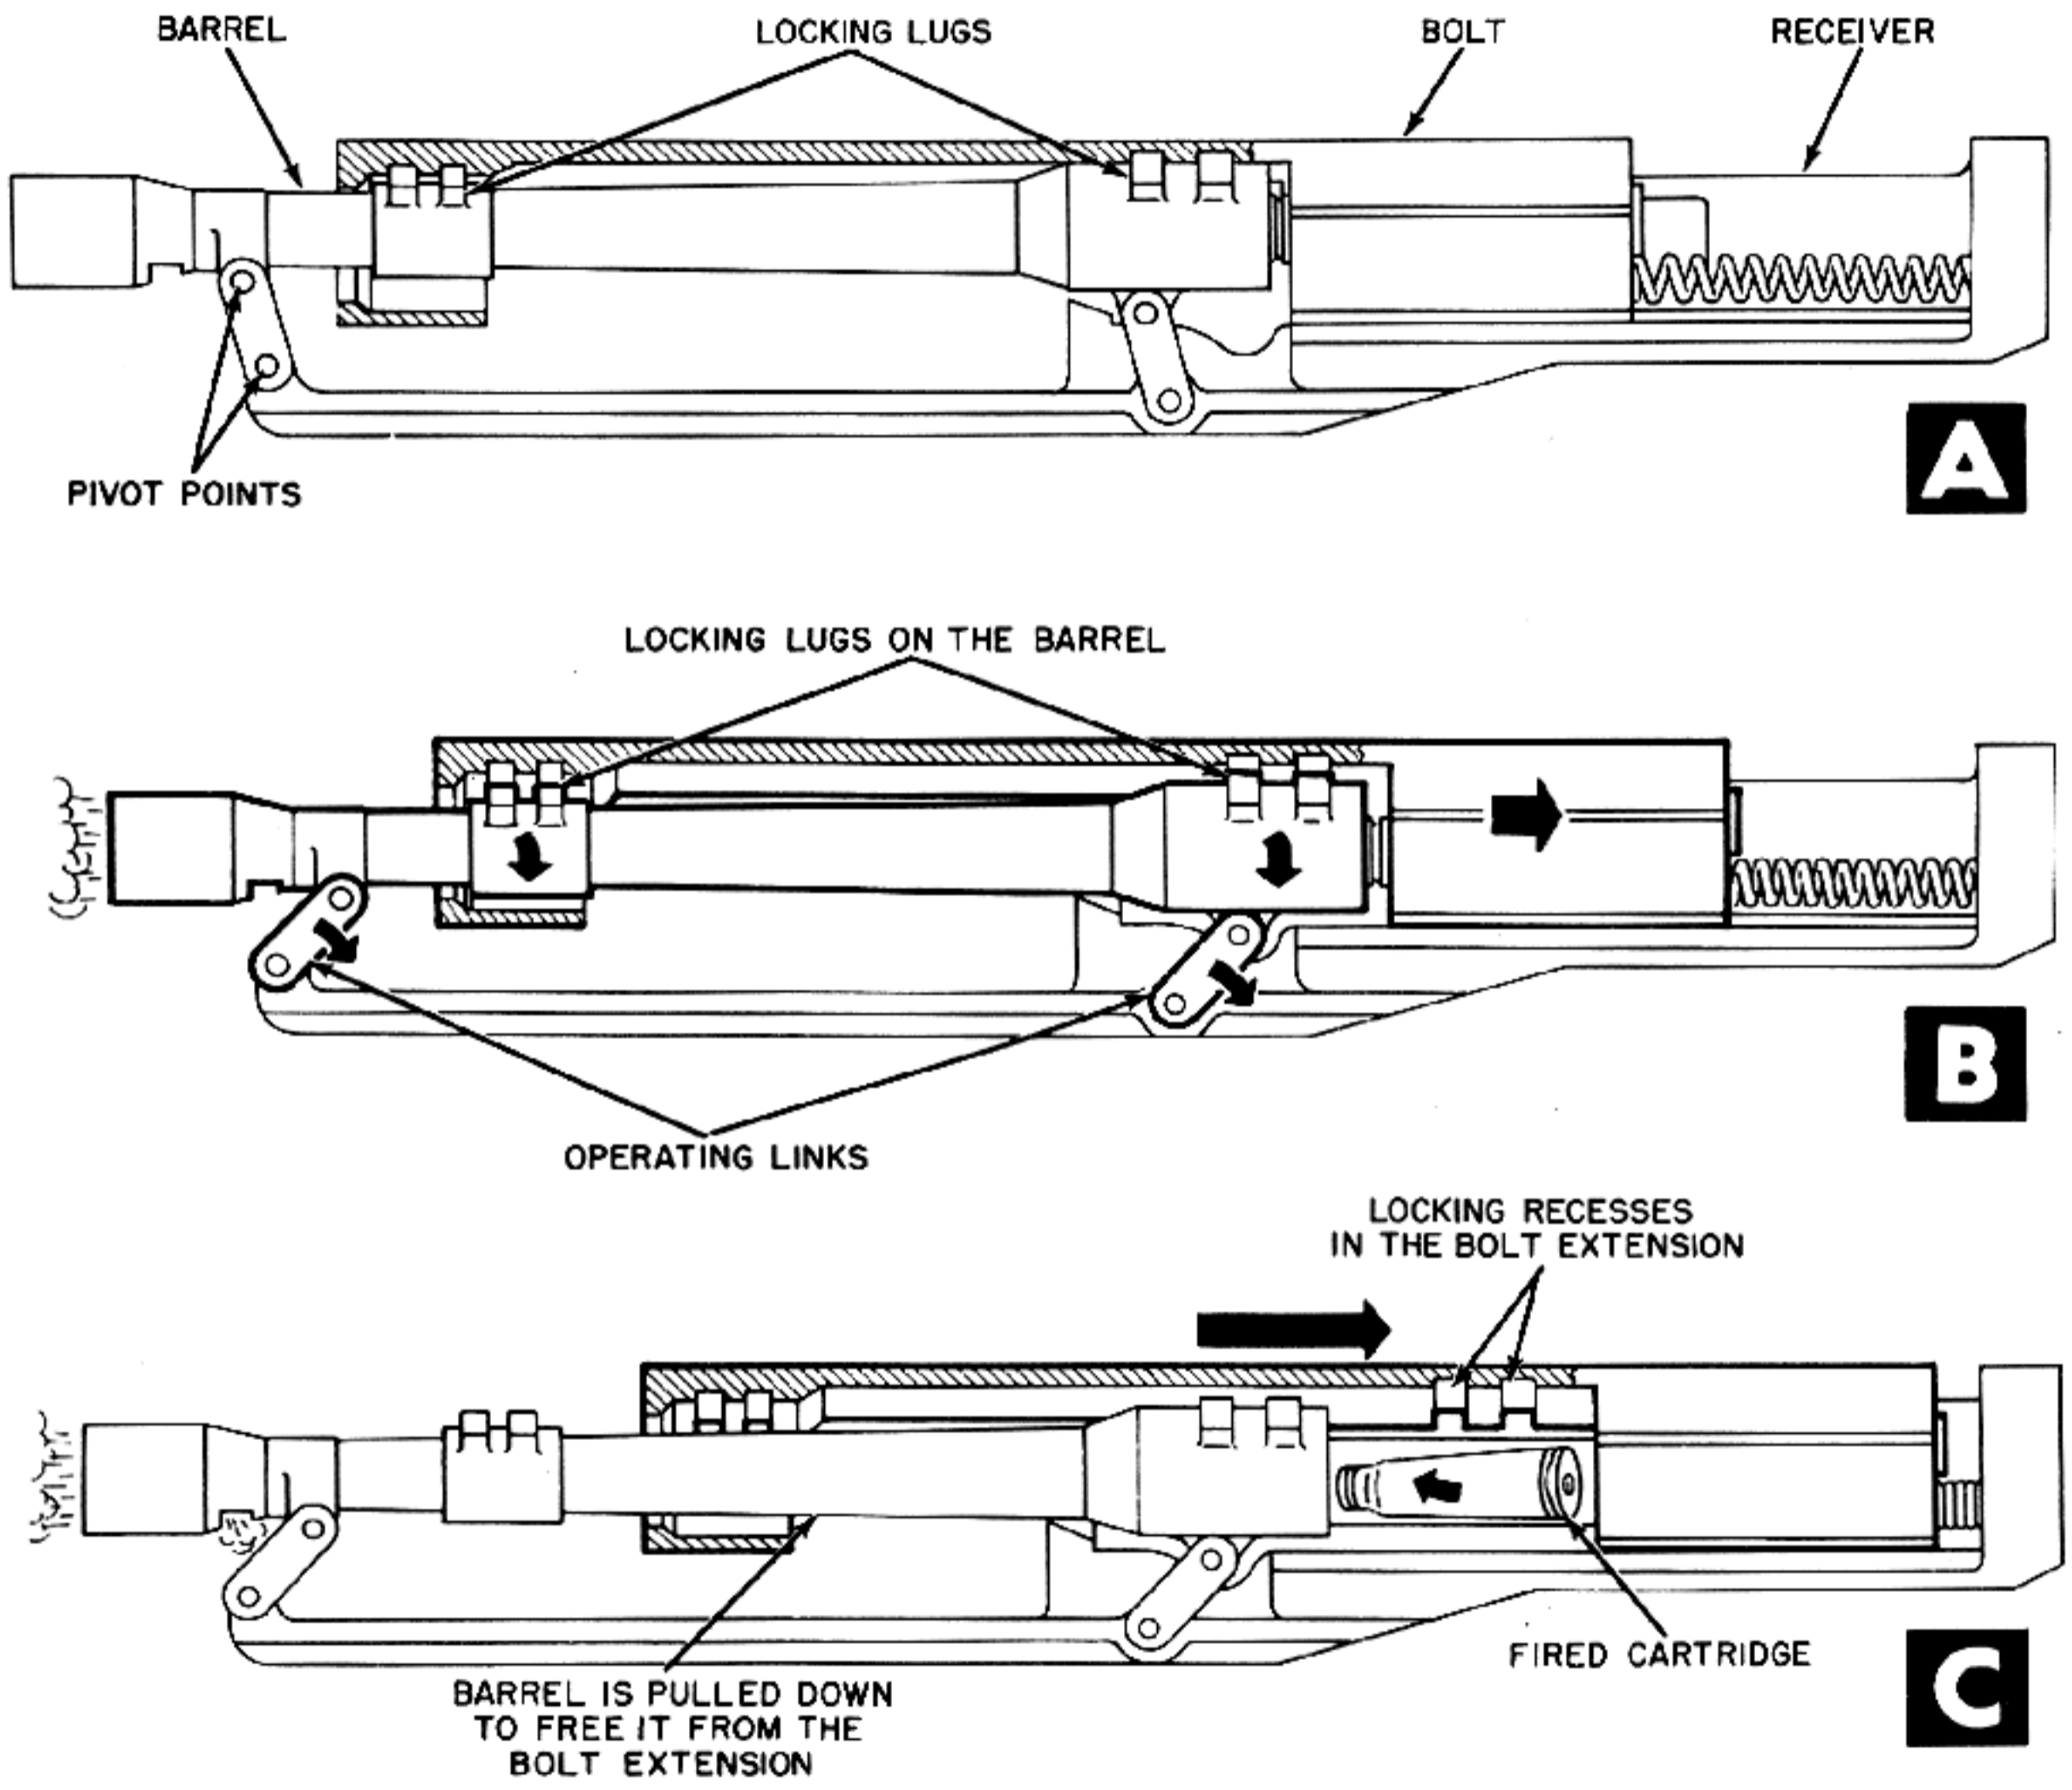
Locking Link Unlocks Barrel From Bolt.
